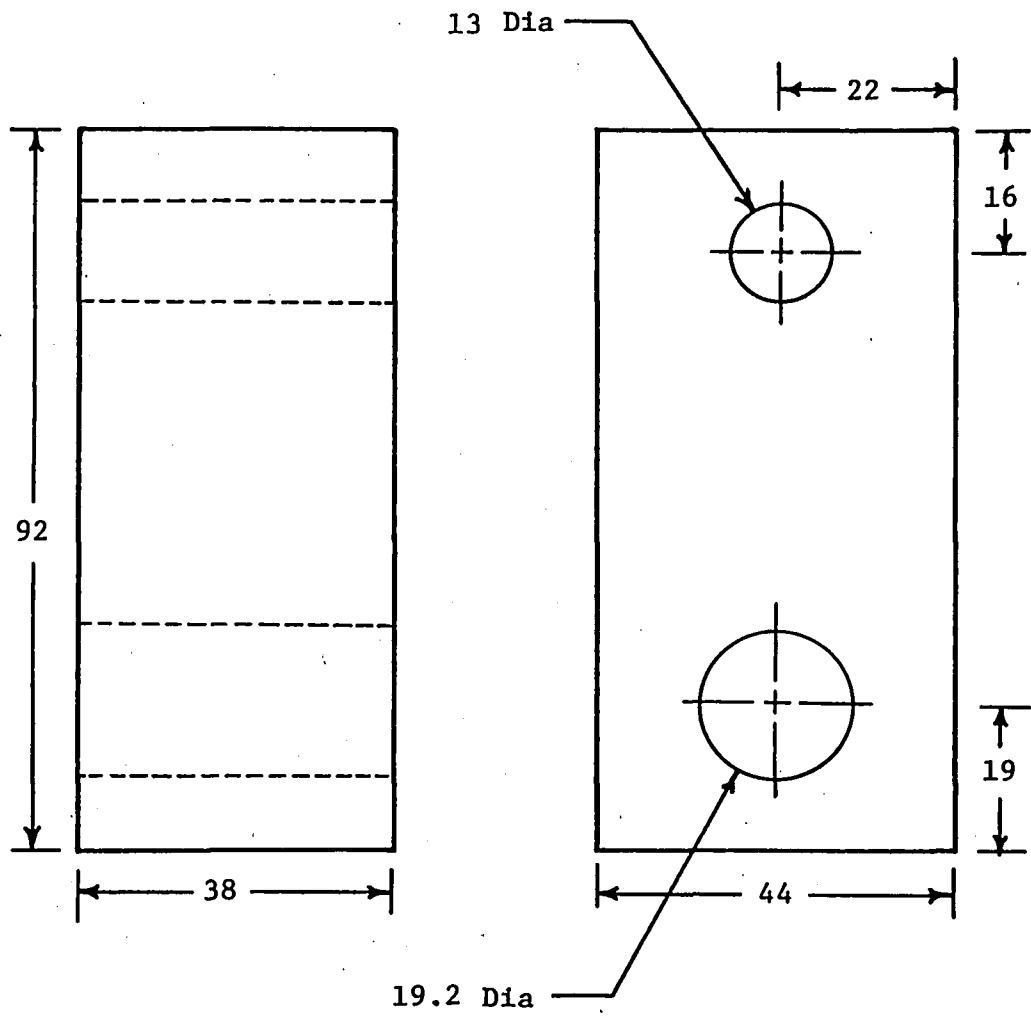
Lower Tie Rod, Specimen Mounting Assembly
